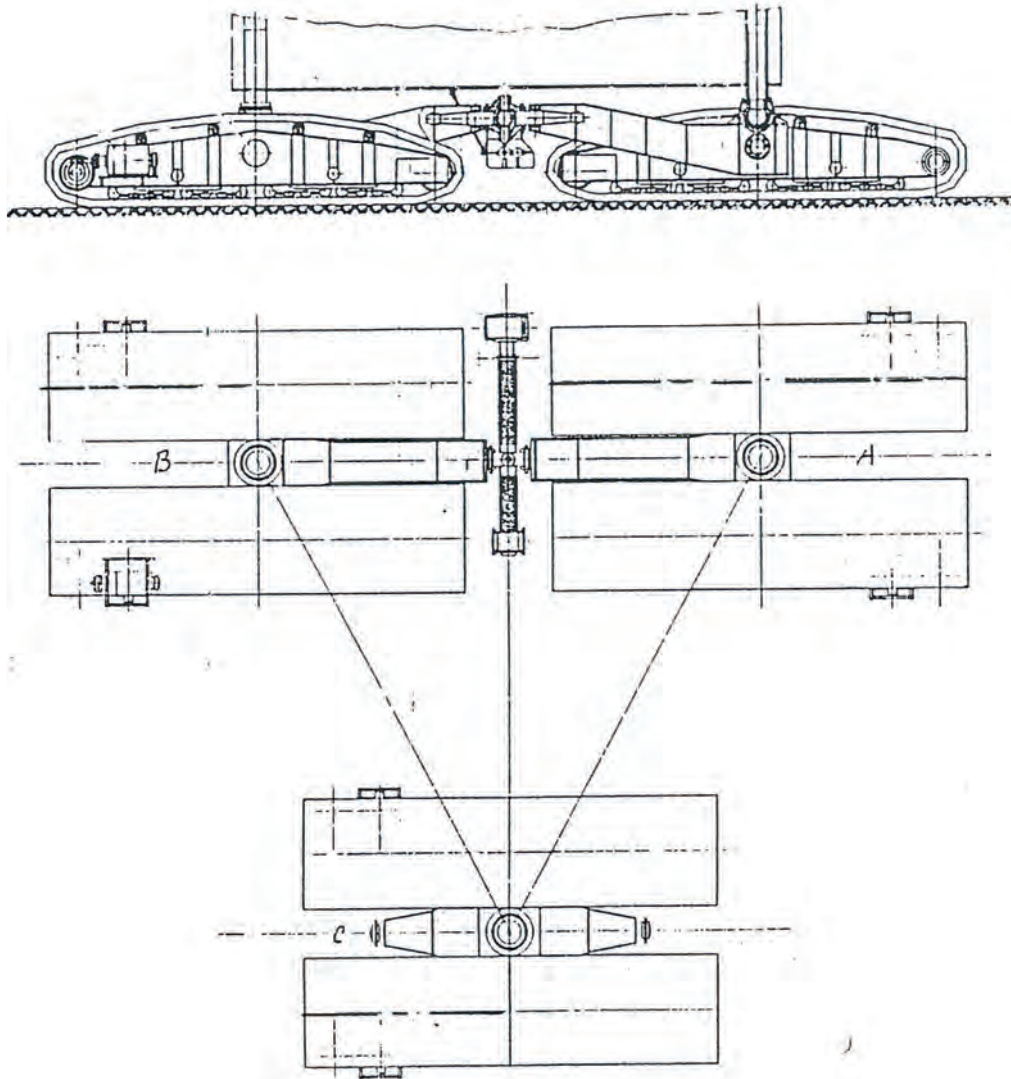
BWE SchRs 4000 chassis assembly [18]
